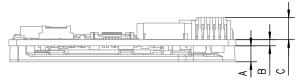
FETK-T1.1 Dimensions - Side View
